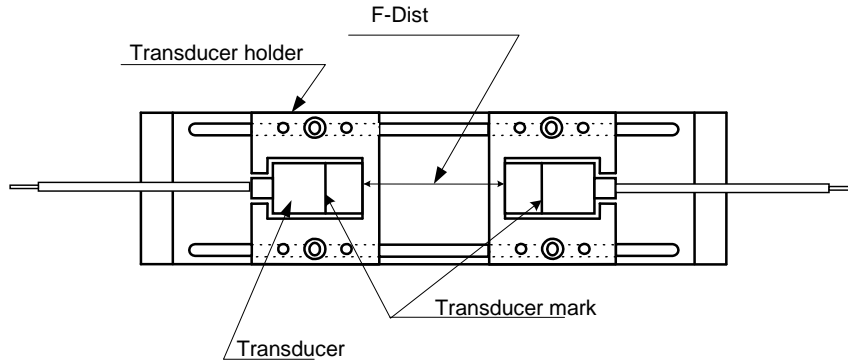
View of Transducer Setting Prior to Mounting Plate Installation
